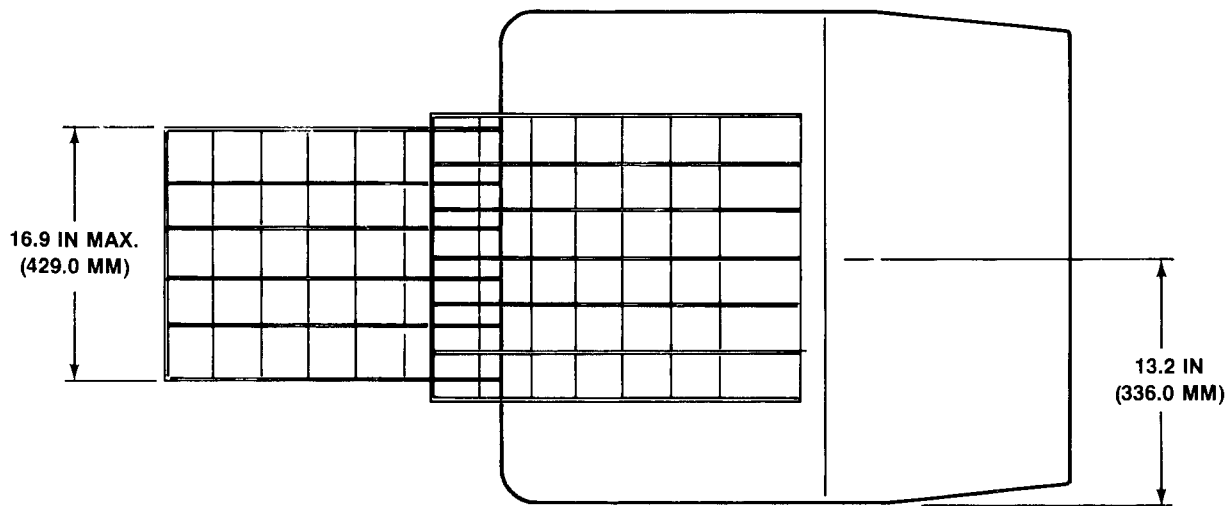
Printer with Optional Paper Receptacle, Outline Dimensions
